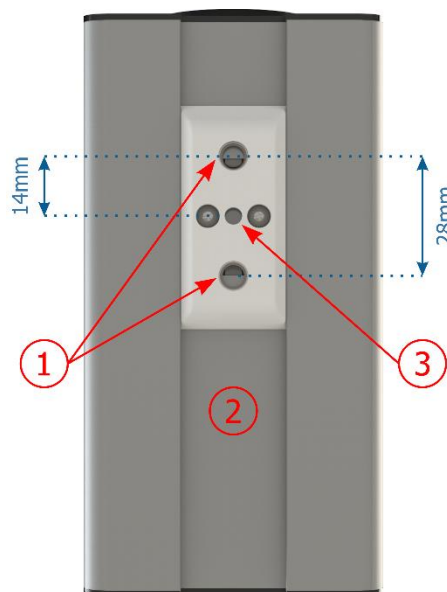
Attachment Mechanism specifications: 1) Thread for 1/4" screws; 2) Rail for changing the attachment point; 3) Ø4mm hole for guide pin
